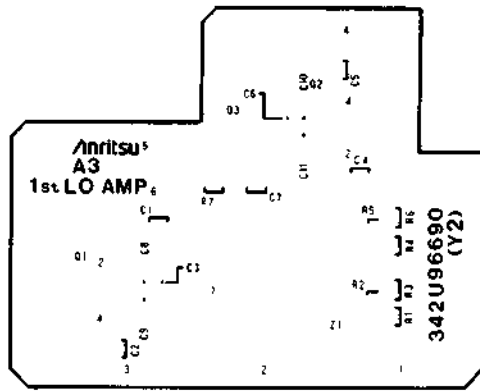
A2-A3 1st LO AMP PC-Board Parts Layout 12
